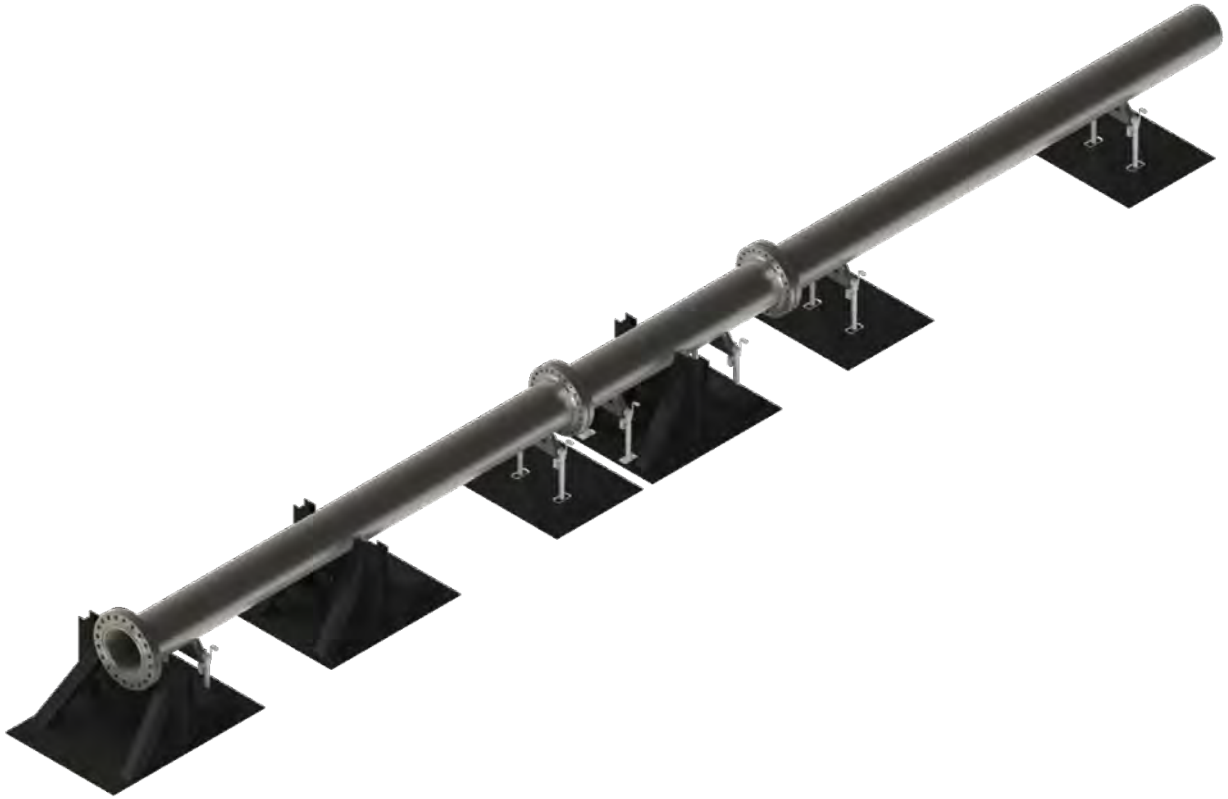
Computer aided design model for accelerator pipe as it appears with a 900-lb flange on the driven side of the segment, structural stands, and roller supports.
